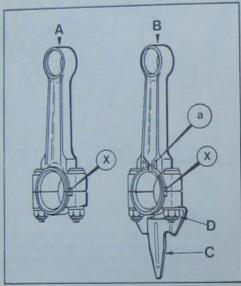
A = Vertical shaft con-rod B = Horizontal shaft con-rod
